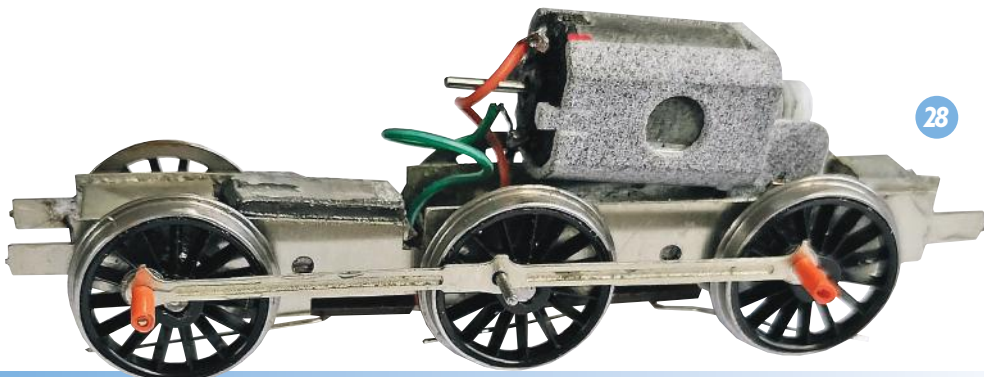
shows a 14.2mm-gauge chassis with an SD146 gearbox driving the front axle, built by Graham Shirley. The nickel-silver wiper pick-ups show clearly behind the driving wheels and the chassis has been weighted with lead strips.
